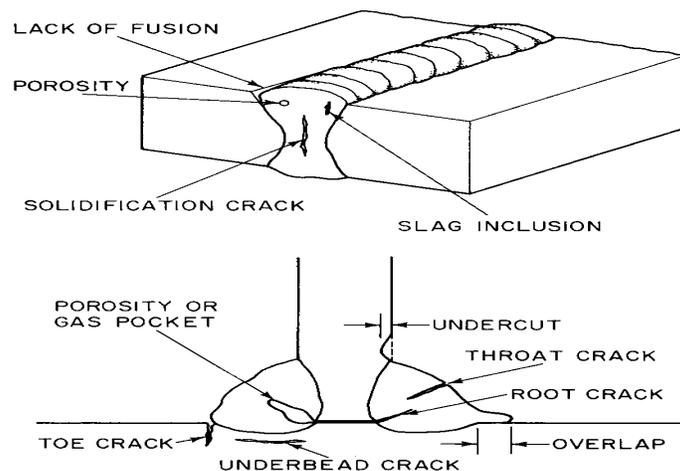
Potential Weld Flaws as a Result of Improper Welding
